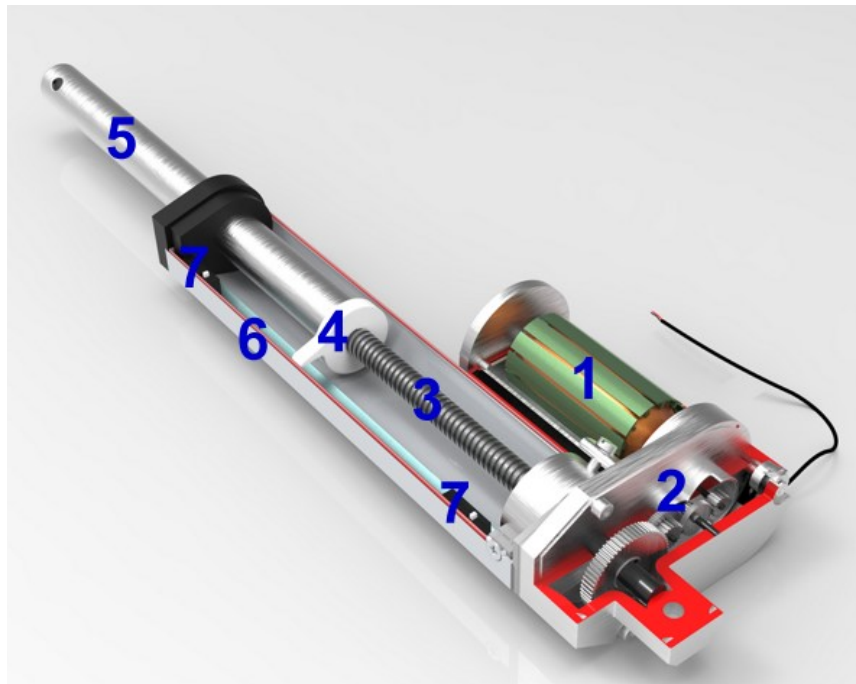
Linear electromechanical actuator with brushed DC motor [source: www.firgelliauto.com], 1 - DC motor, 2 - Gearing, 3 - Lead-screw, 4 - Nut, 5 - Rod, 6 - Housing, 7 - Limit switches
